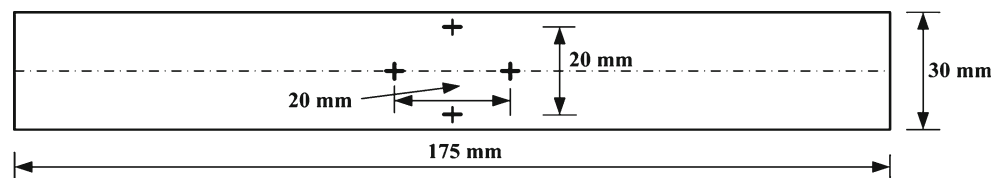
Tensile test specimen dimensions as per ASTM-B557M
